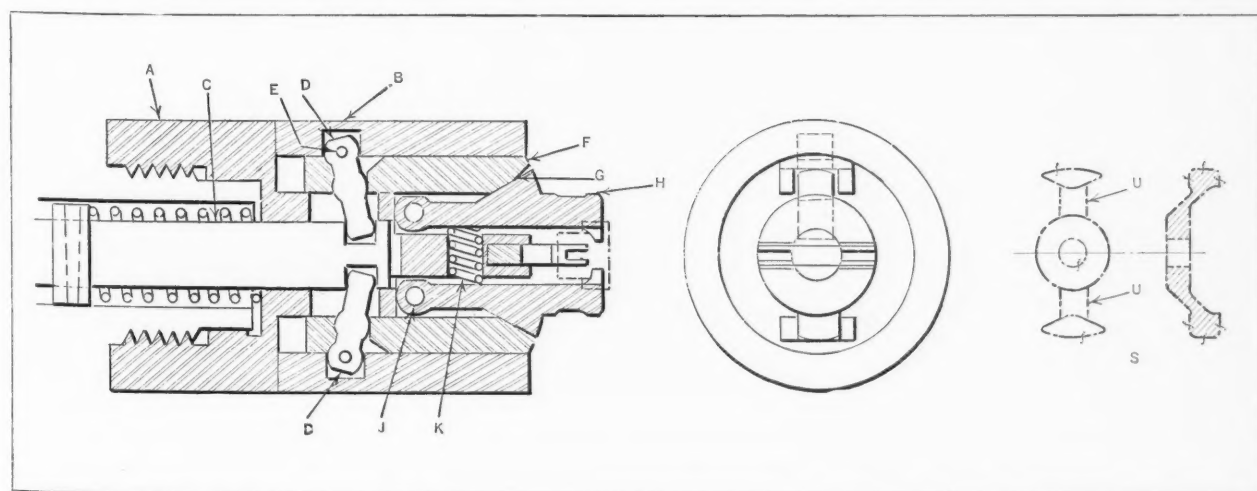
Air-operated Chuck Used on Turret Lathe for Holding Piece *S
